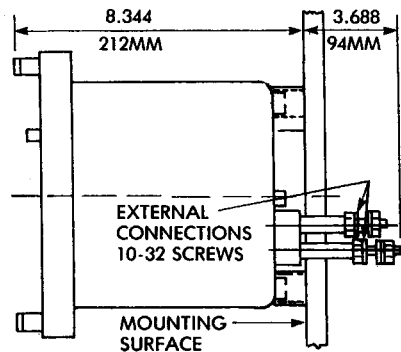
Types C1 case relays recommended for surface mounting (side view) for panels larger than 0.188 in. (5mm) thick
